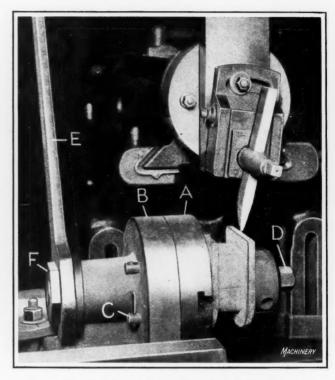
Shaper equipped for performing Planing Operations on a Driving-rod Brass
